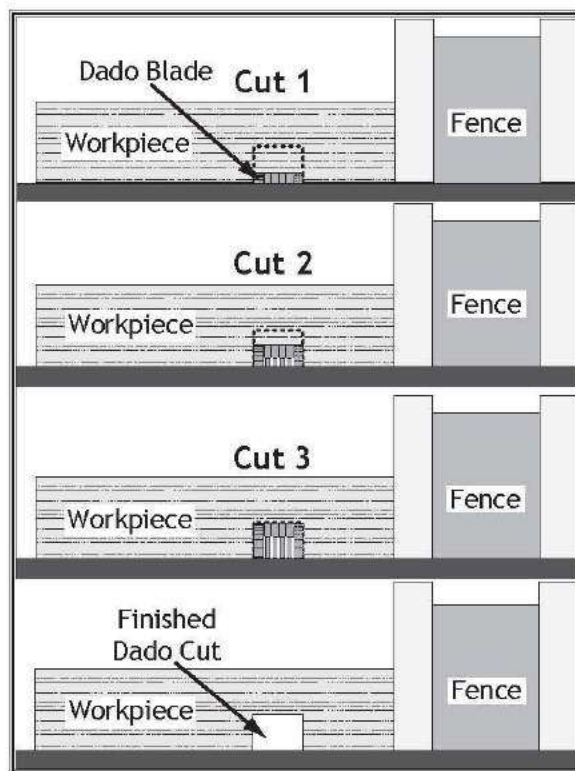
Example of dado being cut with multiple light cuts, instead of one deep cut.
